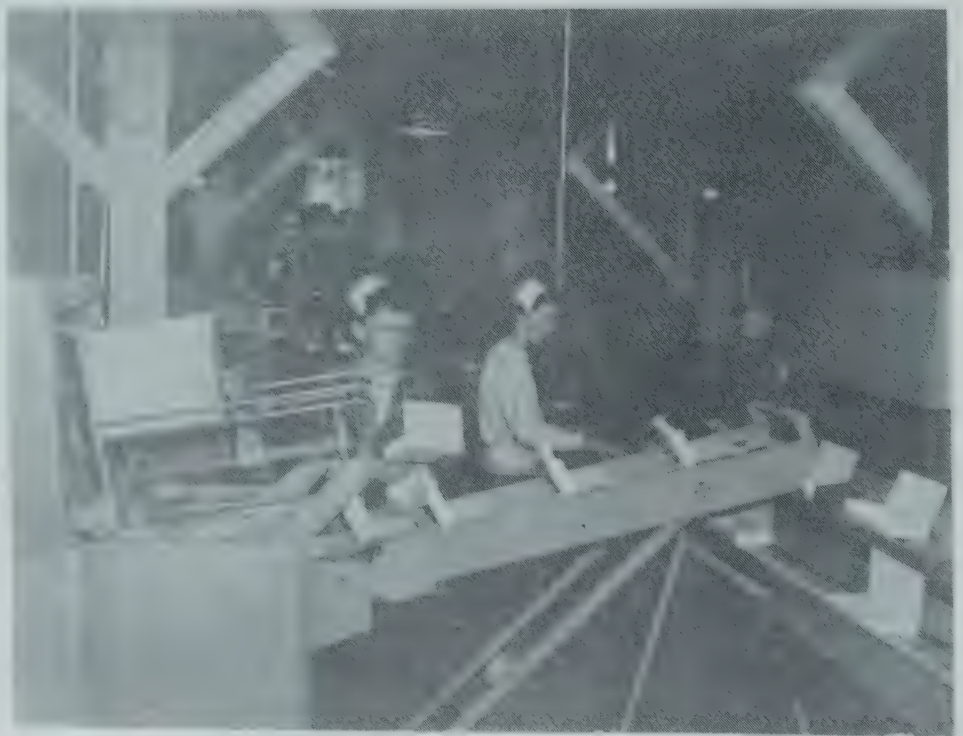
Machine for making cartons. (Photo courtesy of New England Fish Co.)
